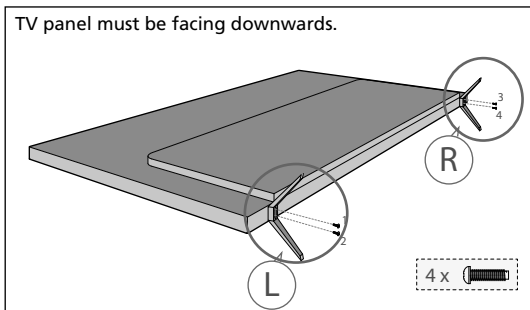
Place the TV set on a flat and clean surface with the panel facing downwards to avoid damage, then fix the stand feet shown. The feet are marked L (left) and R (right).
